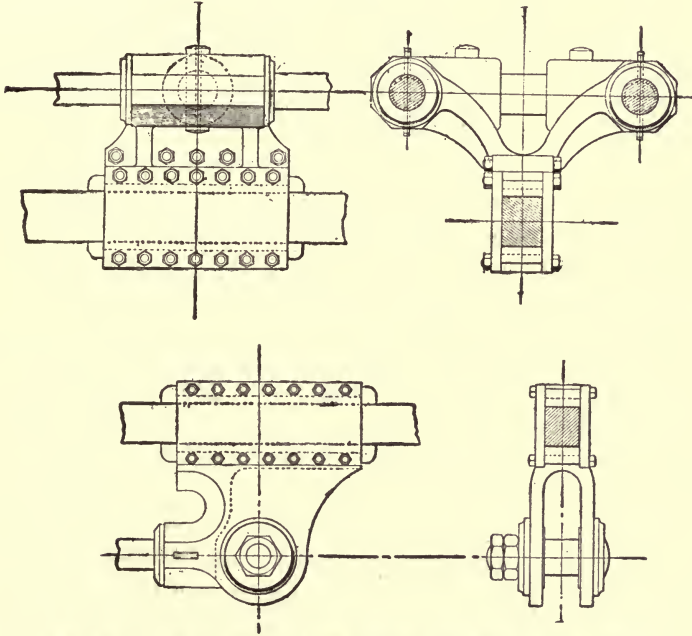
Early Gaskill Cross Heads, High and Low Pressure.
